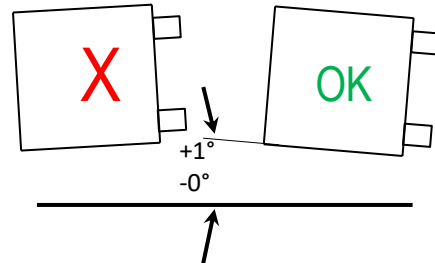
Coil Module Level Tolerance as seen from the Coil Module End Sides
